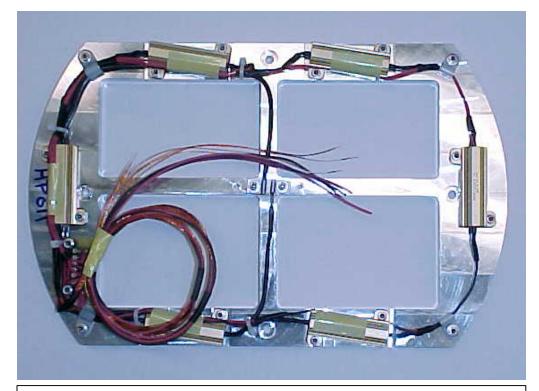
Photograph of an ambient flange heater, before the connectors have been installed on the power or sensor wires.
